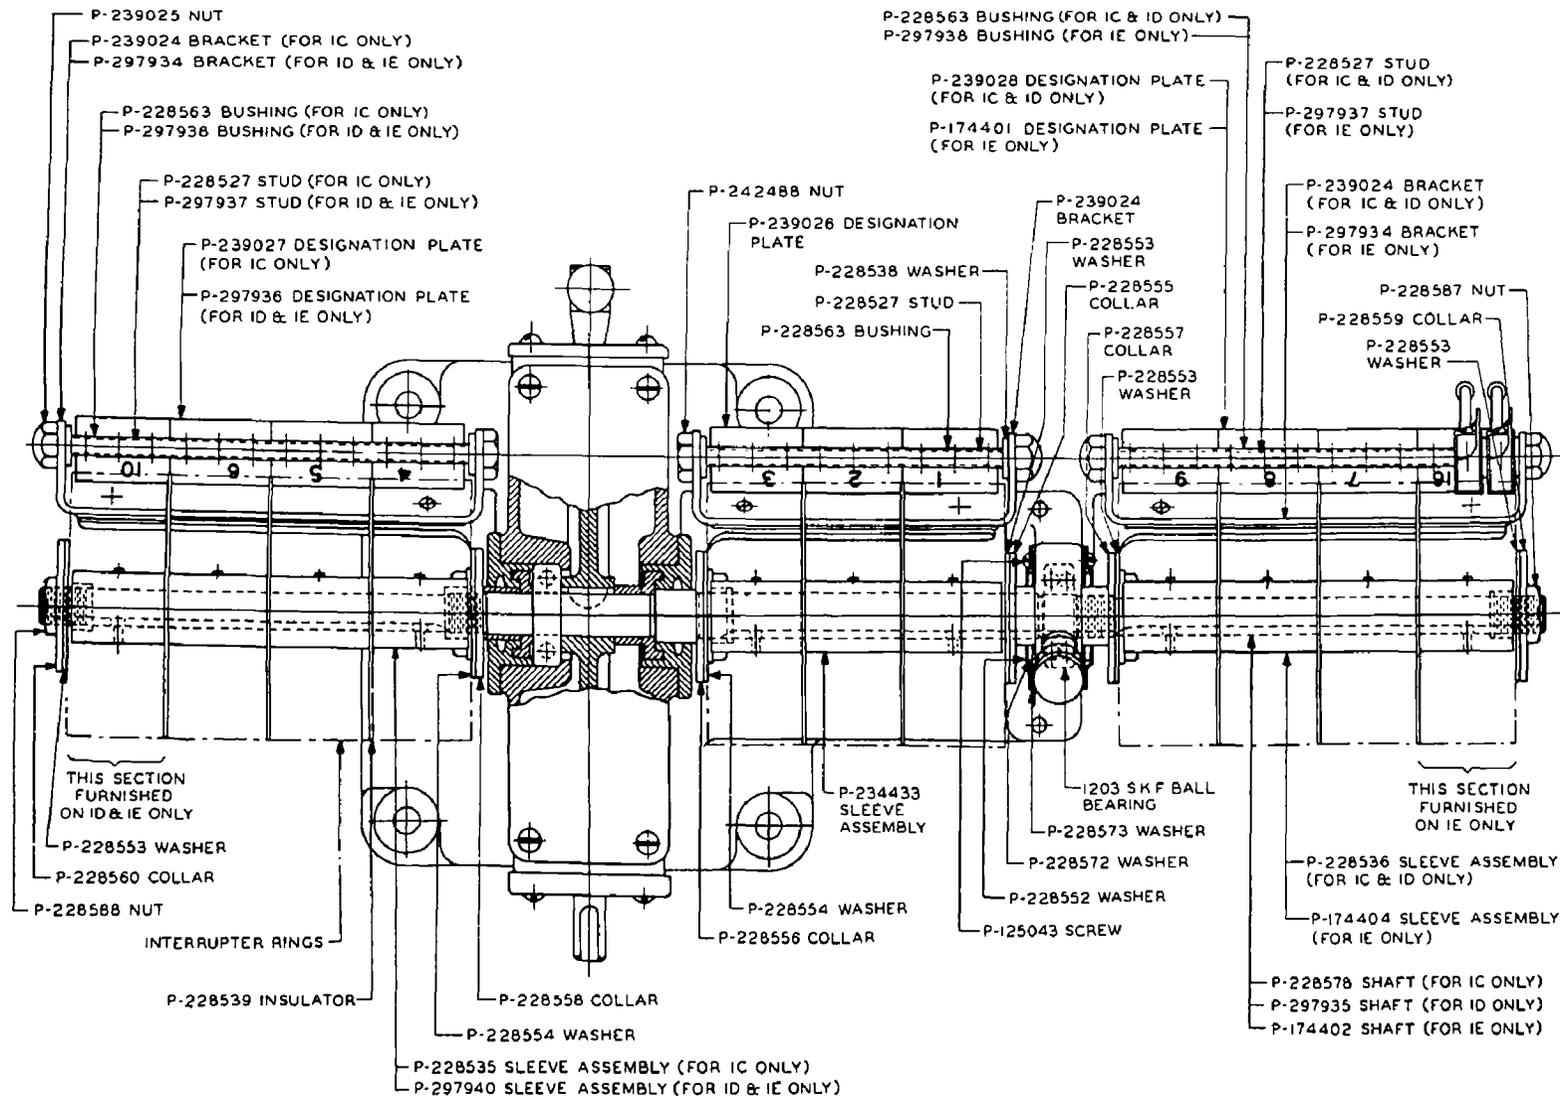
IC, ID, and IE Interrupter Mountings—Top View (For Side View See Fig. 6)
